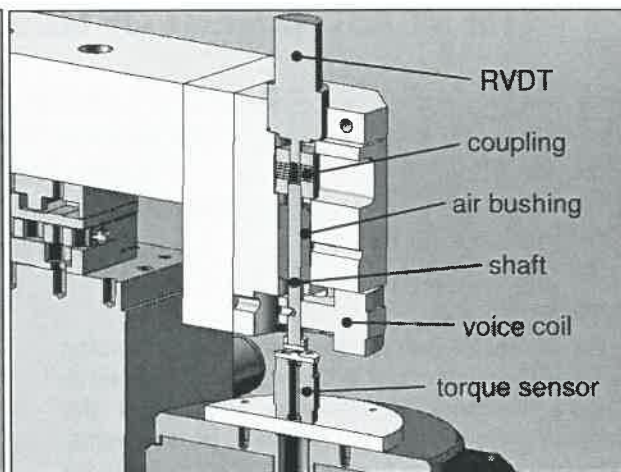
A cross-sectional view of the prototype system identifying critical elements of the actuation mechanism.
